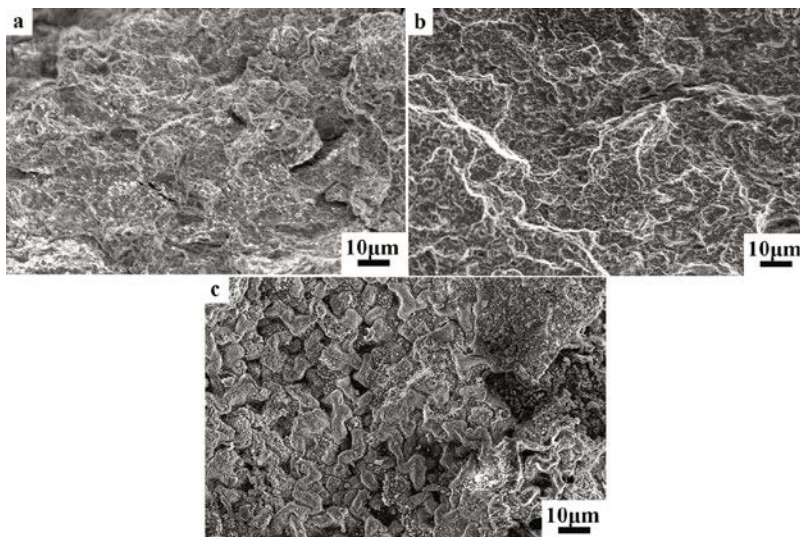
Fracture surface of K418 40Ni specimens: (a) HIPed; (b) solution treated; (c) aged
